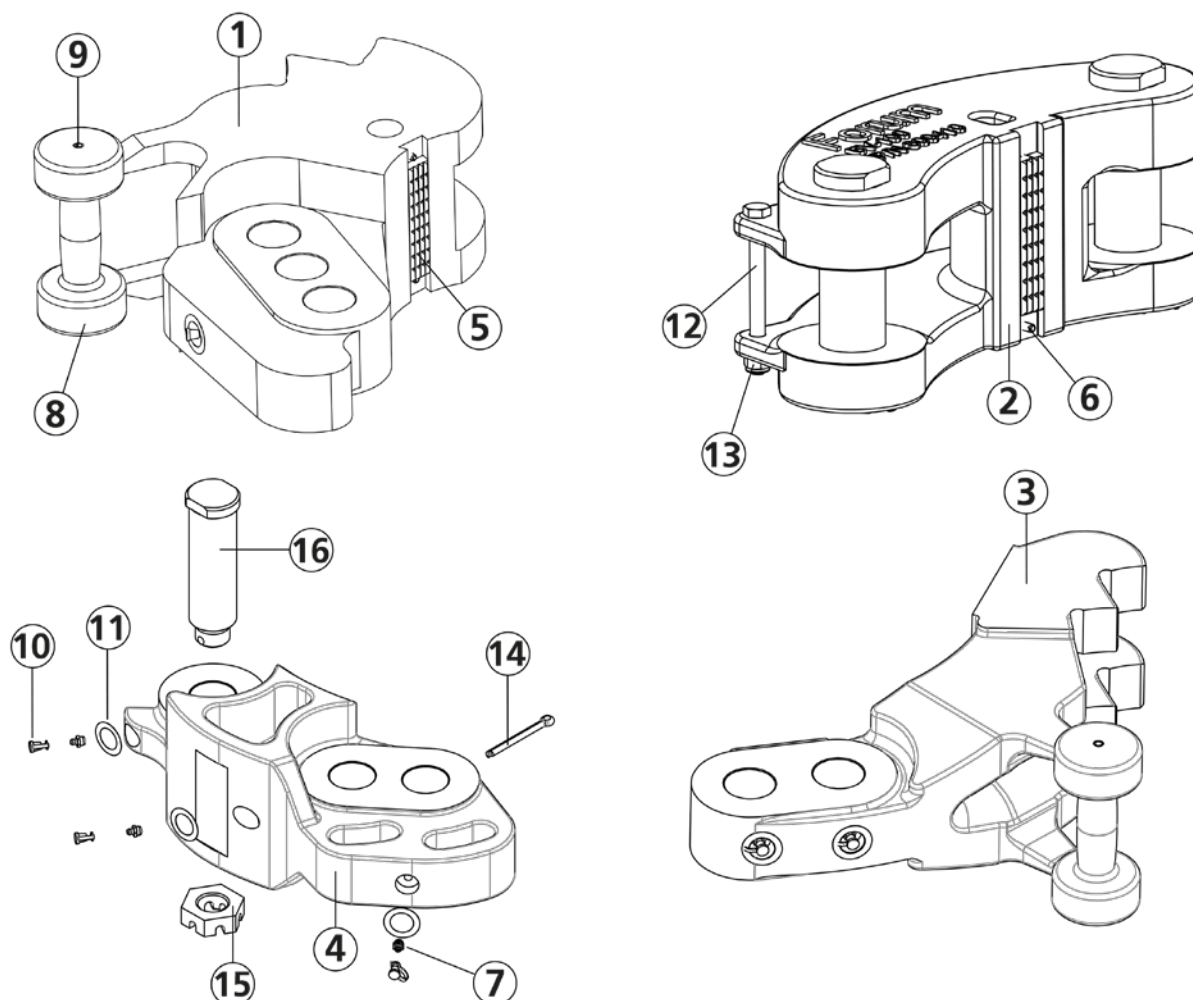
Drawings of Lug Jaw and Hinge Jaw Assemblies
